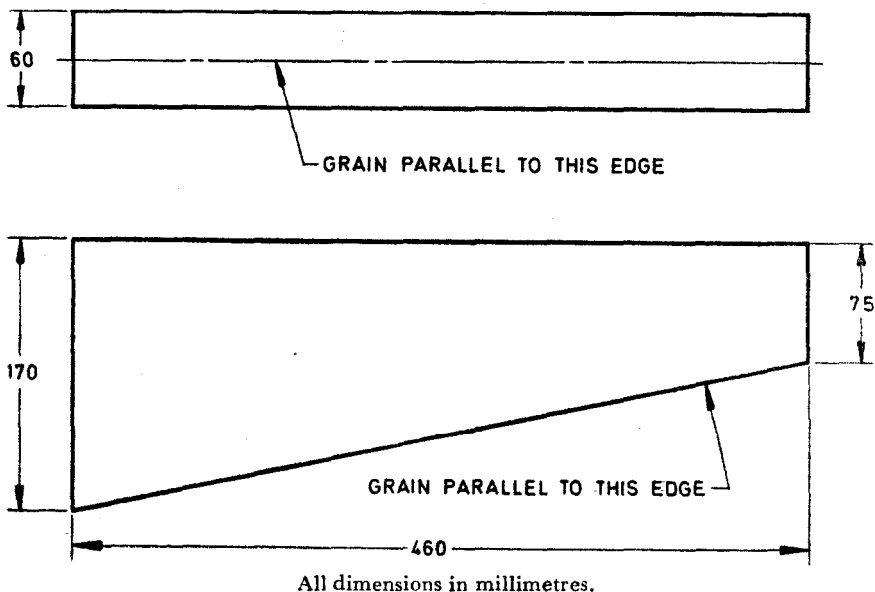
HALF WROUGHT FOR BUTT END OF DOUBLE BORE SHOT GUN
